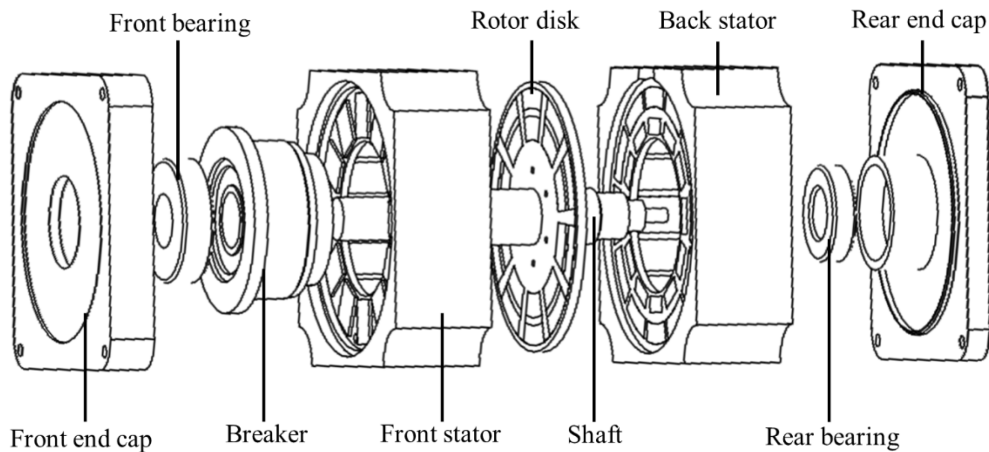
Exploded view of the overall structure of DS-HSDR-TFPMSM
